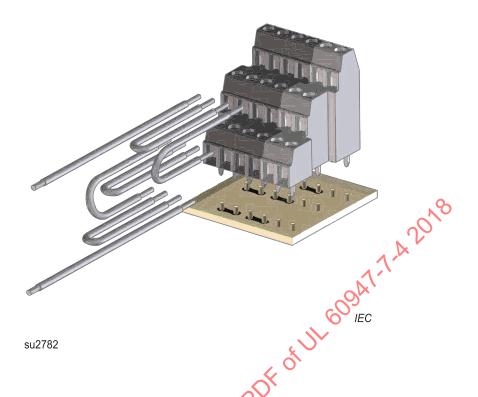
Example of wiring structure of a multi-tier PCB terminal block
